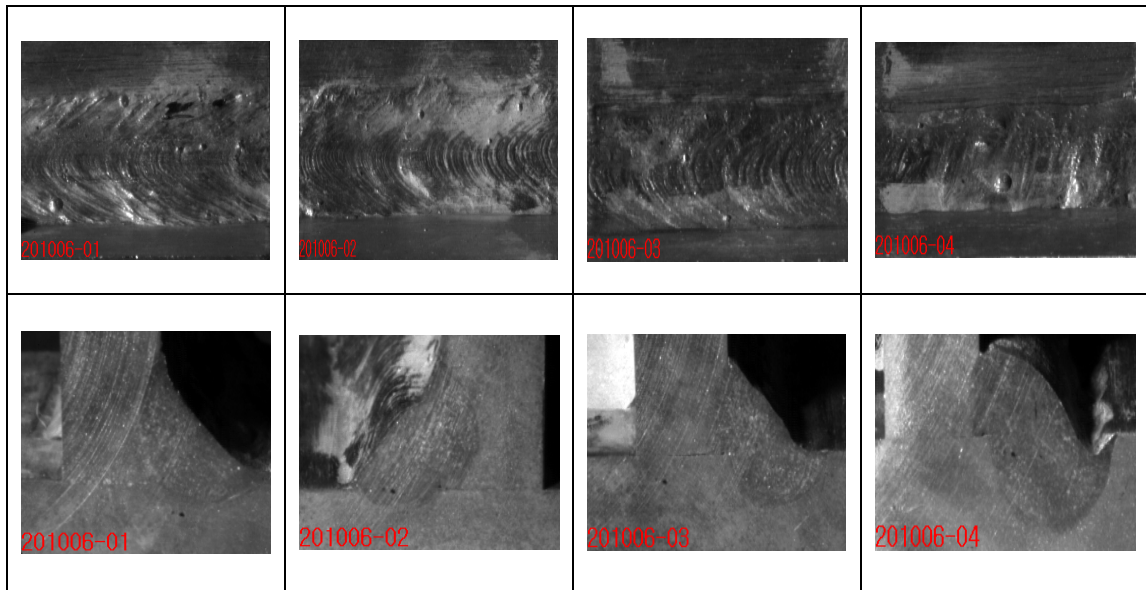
Bead shapes&Cross-section of fillet joints by Hybrid welding combine&focusing position(Laser power:3KW/194A/23.2V/Welding speed:1m/min/No gap/Ar:20L/min/WFS:6m/min)
